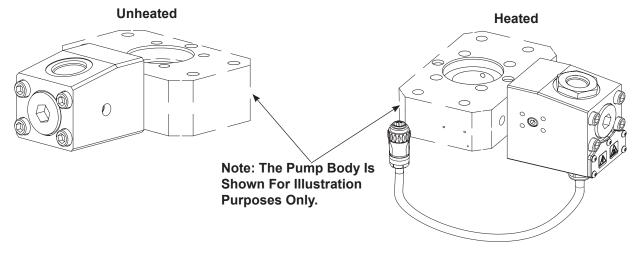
Hydraulic Section Pump Outlet Manifold
